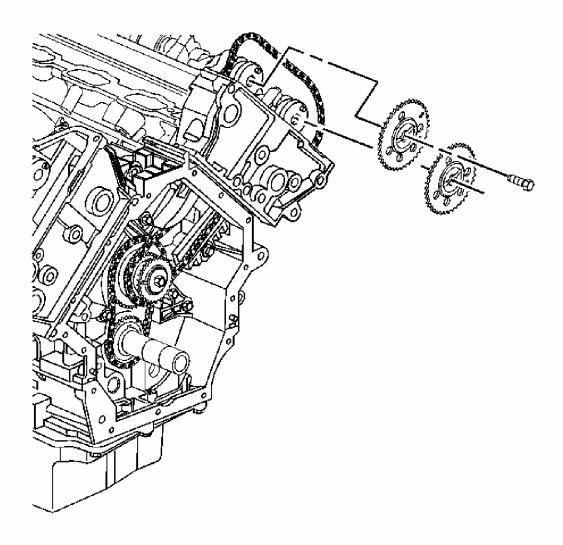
Identifying Left Exhaust Camshaft Sprocket Bolt Courtesy of GENERAL MOTORS CORP.
